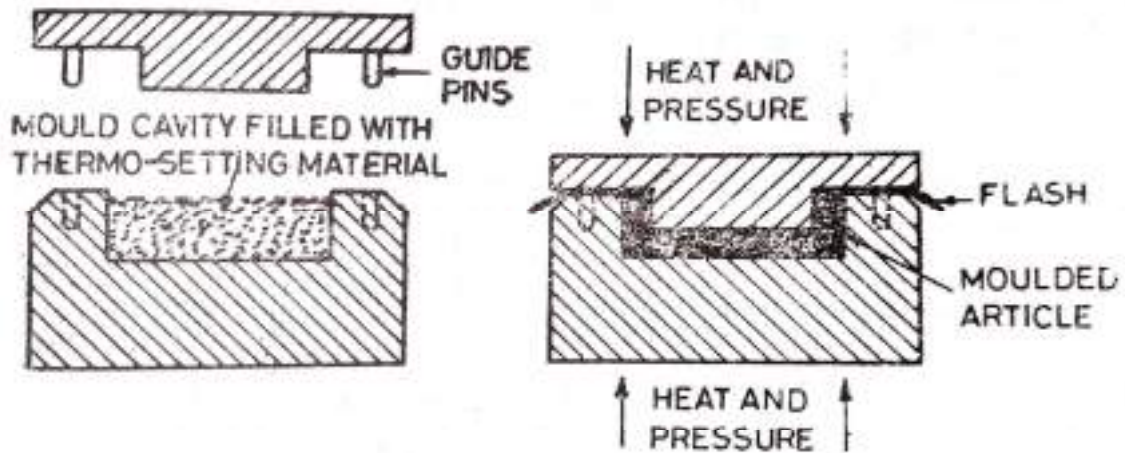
Schematic diagram of a mould employed for compression moulding.
